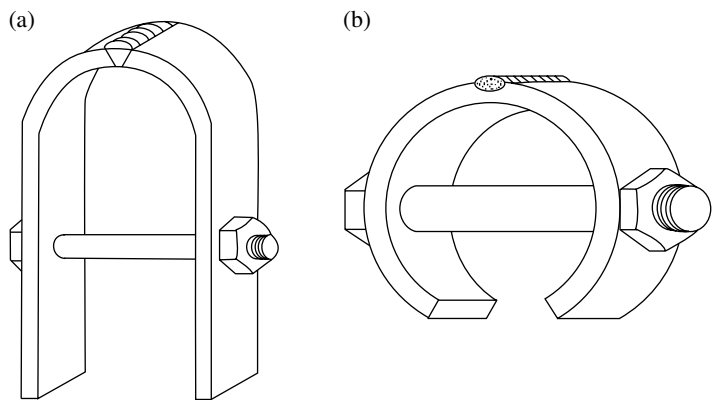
Welded specimen types for immersion corrosion tests. (a) U-bend and (b) C-ring (From Ref. [9]. © ASTM).
